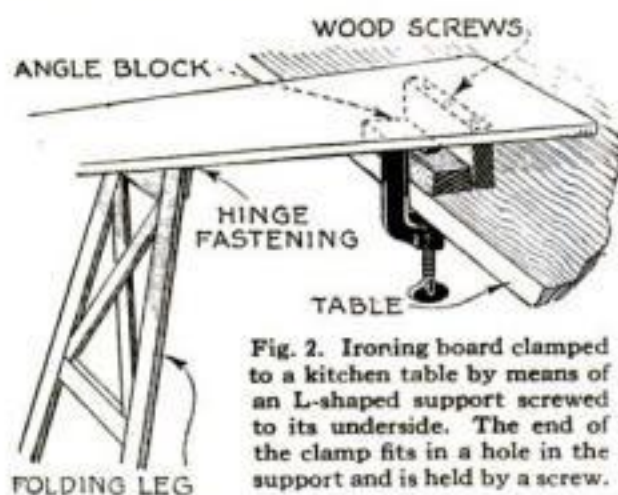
Ironing board clamped to a kitchen table by means of an L-shaped support screwed to its underside. The end of the clamp fits in a hole in the support and is held by a screw.
